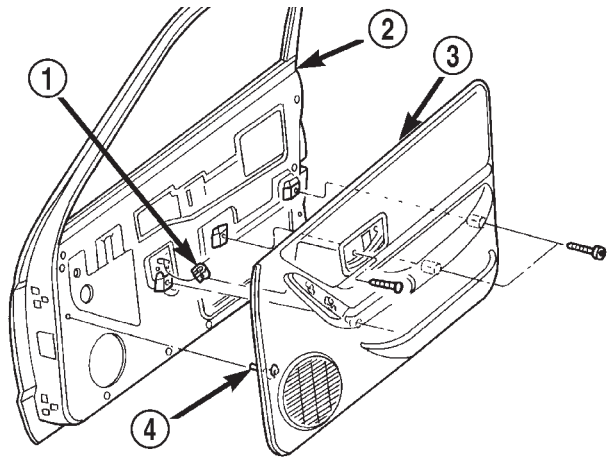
Front Door Trim Panel Remove/Install - Power Window
